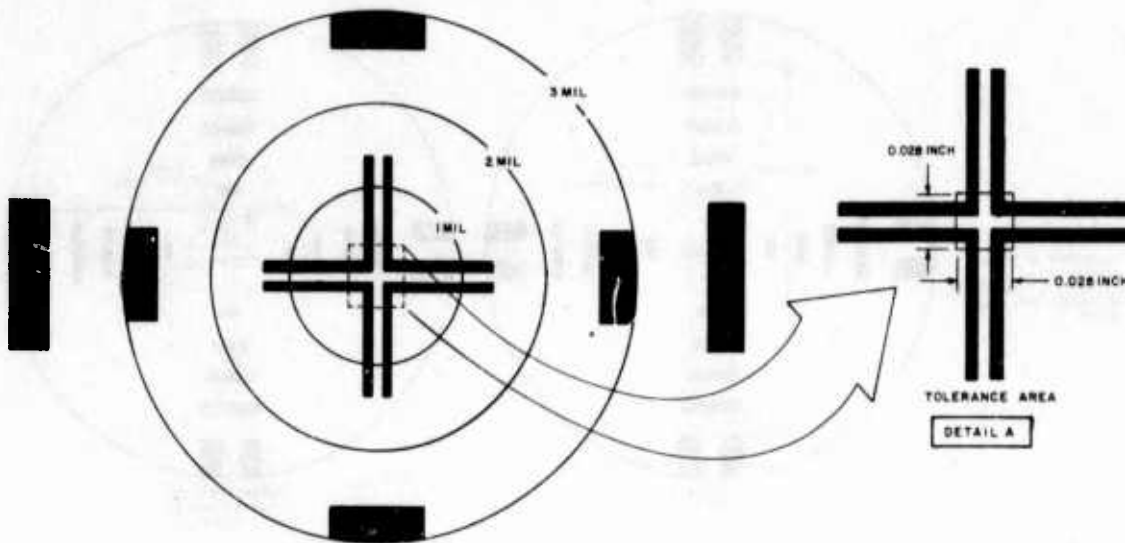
Electrical Equipment Mount Boresight Tolerance.
